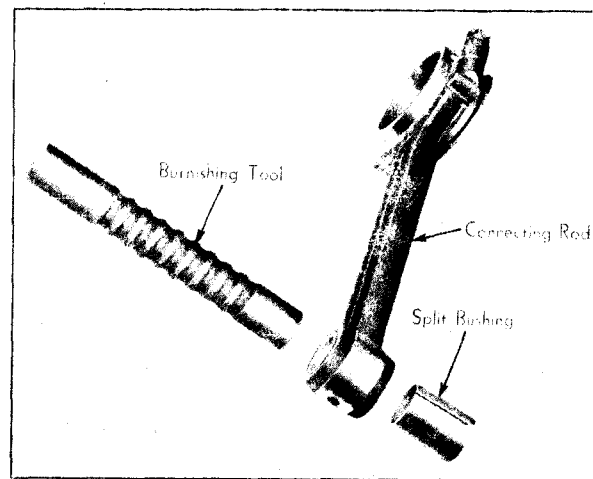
The piston pin bushing is burnished to press the bronze into close contact with the steel rod leaving a long hard-wearing bearing surface
